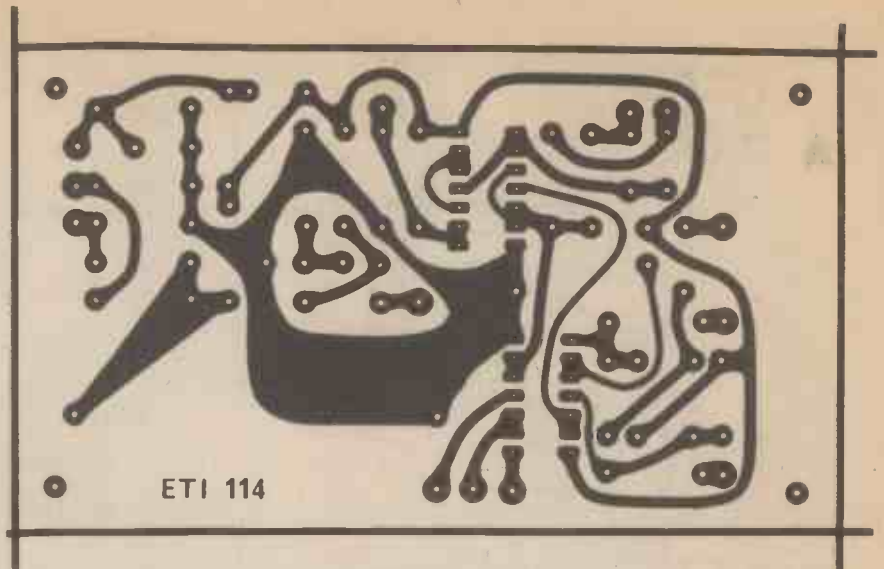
Printed circuit board pattern for the adaptor. (Shown fullsize).
